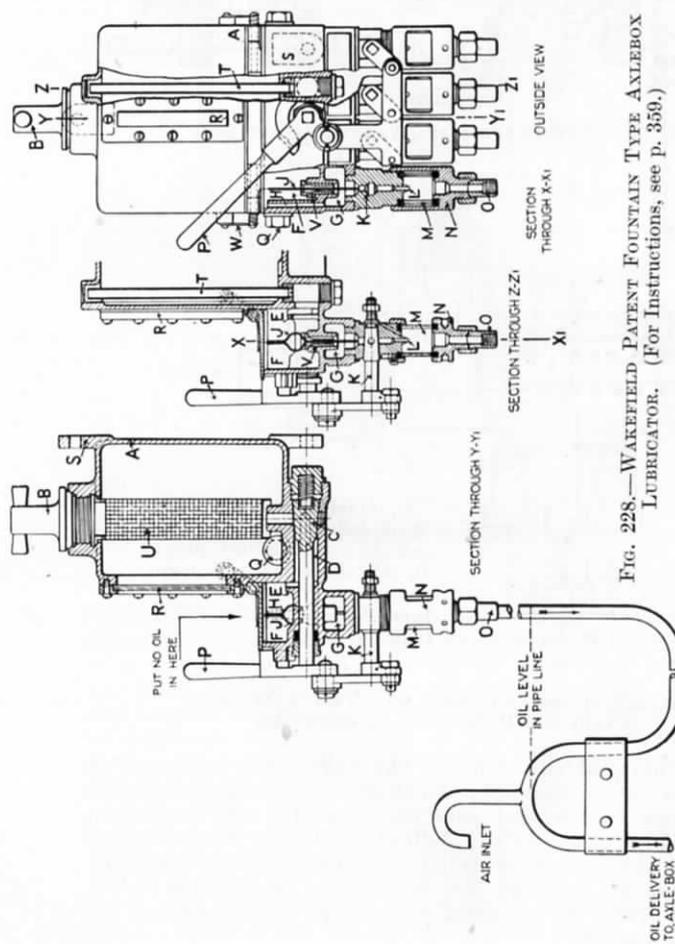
WAKEFIELD PATENT FOUNTAIN TYPE AXLEBOX LUBRICATOR. (For Instructions, see p. 359.)
